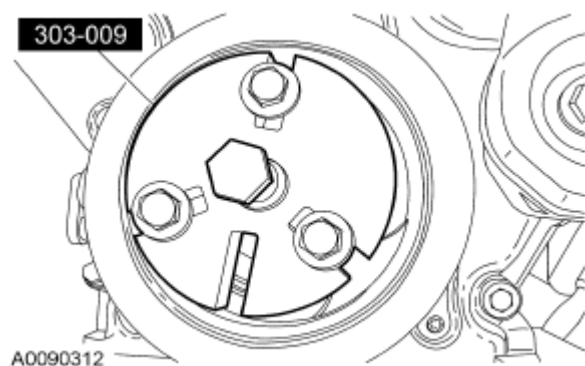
Removing Crankshaft Pulley Using Special Tool (303-009)
